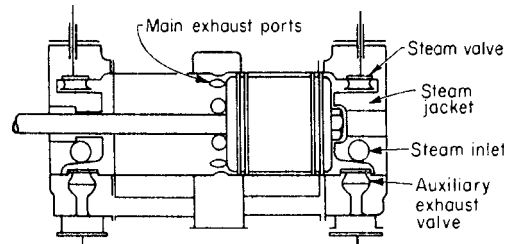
Noncondensing uniflow engine cylinder, with auxiliary exhaust valves.
